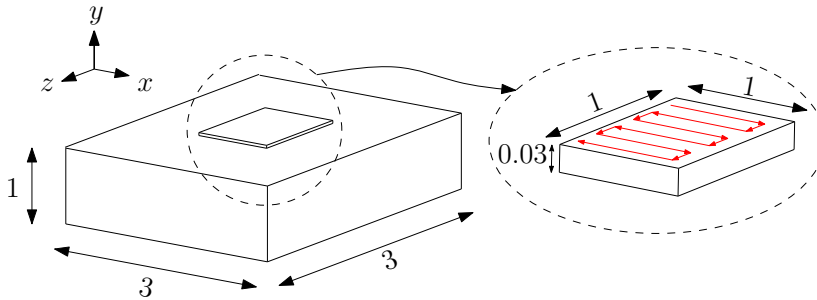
Dimensions of Ti64 layer on steel base plate (mm).
